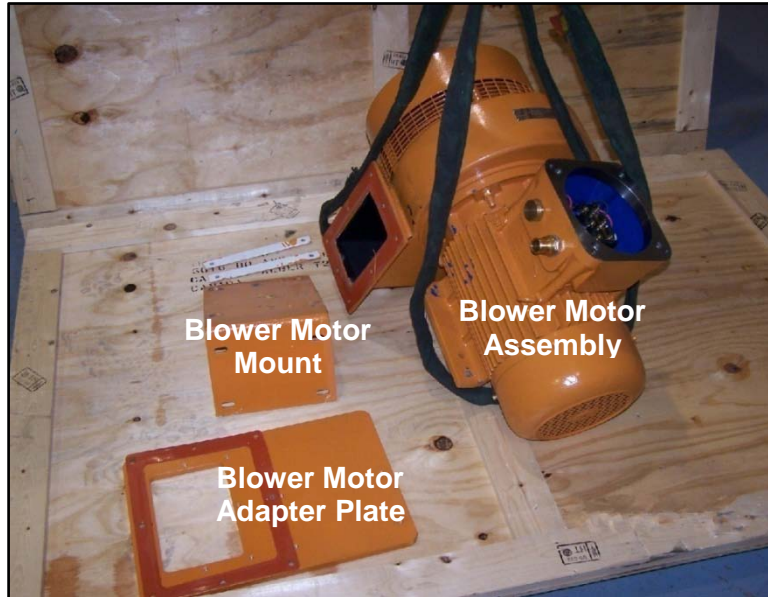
Blower motor assembly, blower motor mount, and blower motor adapter plate shown
